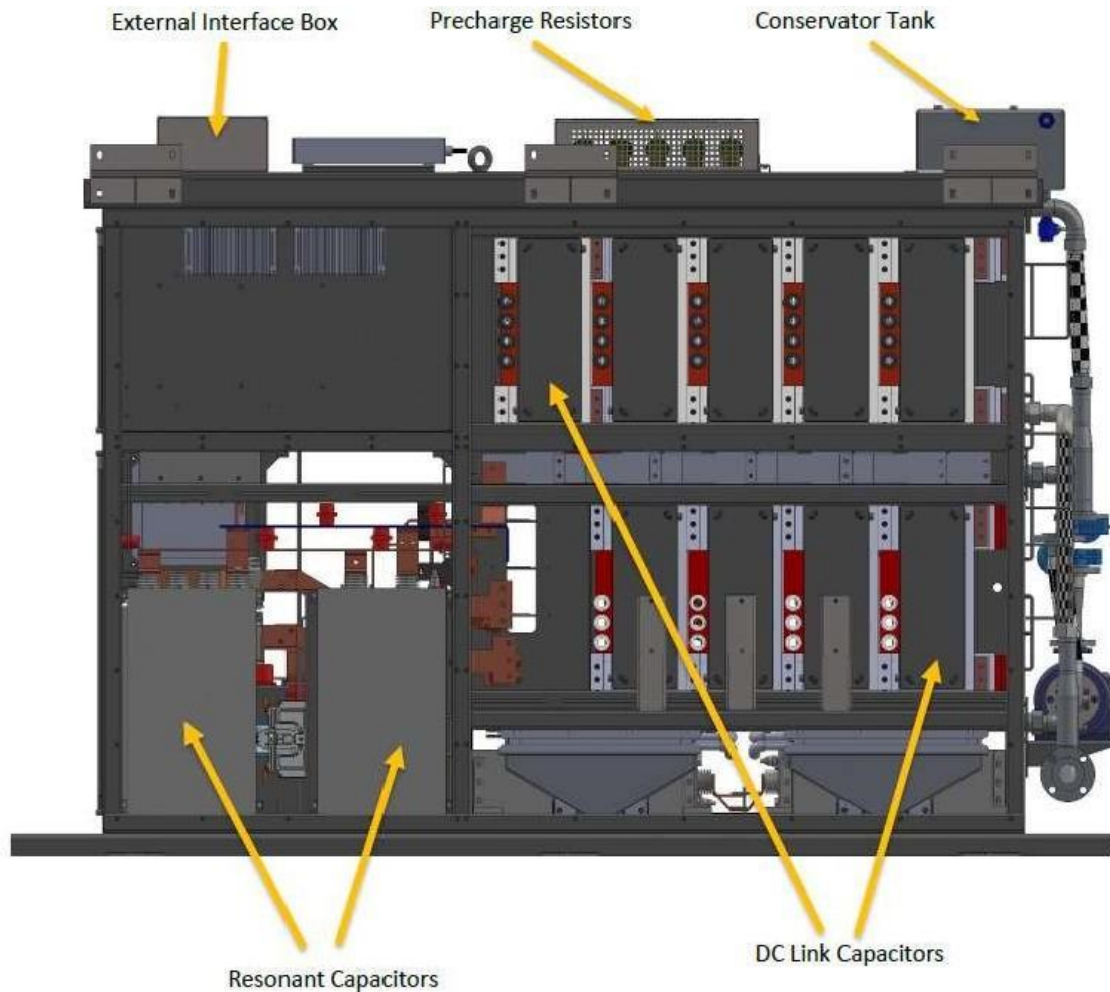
Layout of Components from Rear-view View of SR Converter
